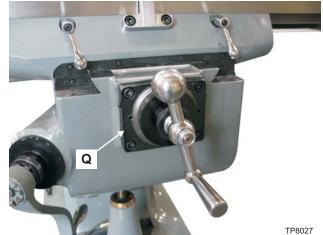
Saddle Feed Handle and Mounting Bracket
